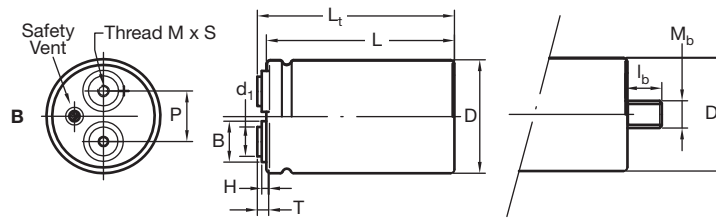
B: High current M6 disc: Screw terminal (ST) and screw terminal bolt nut (STB)
